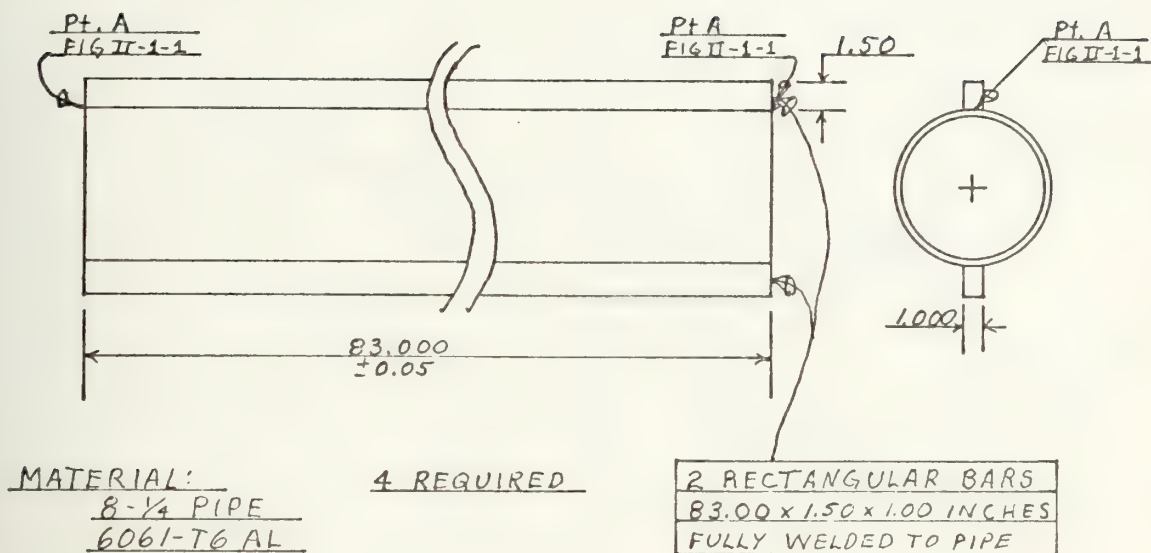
PIECE II-3-4, SUPPORT CONNECTORS
